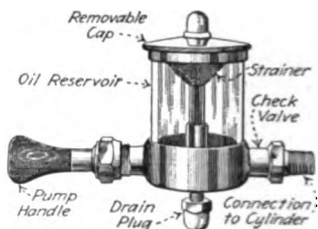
Typical hand push pump with glass body. (Detroit Lubricator Co.)
